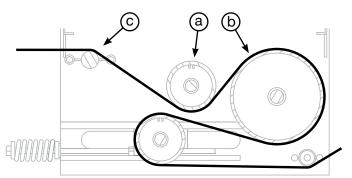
5" pinch roller (a), 10" drive roller (b), idler roller (c)
